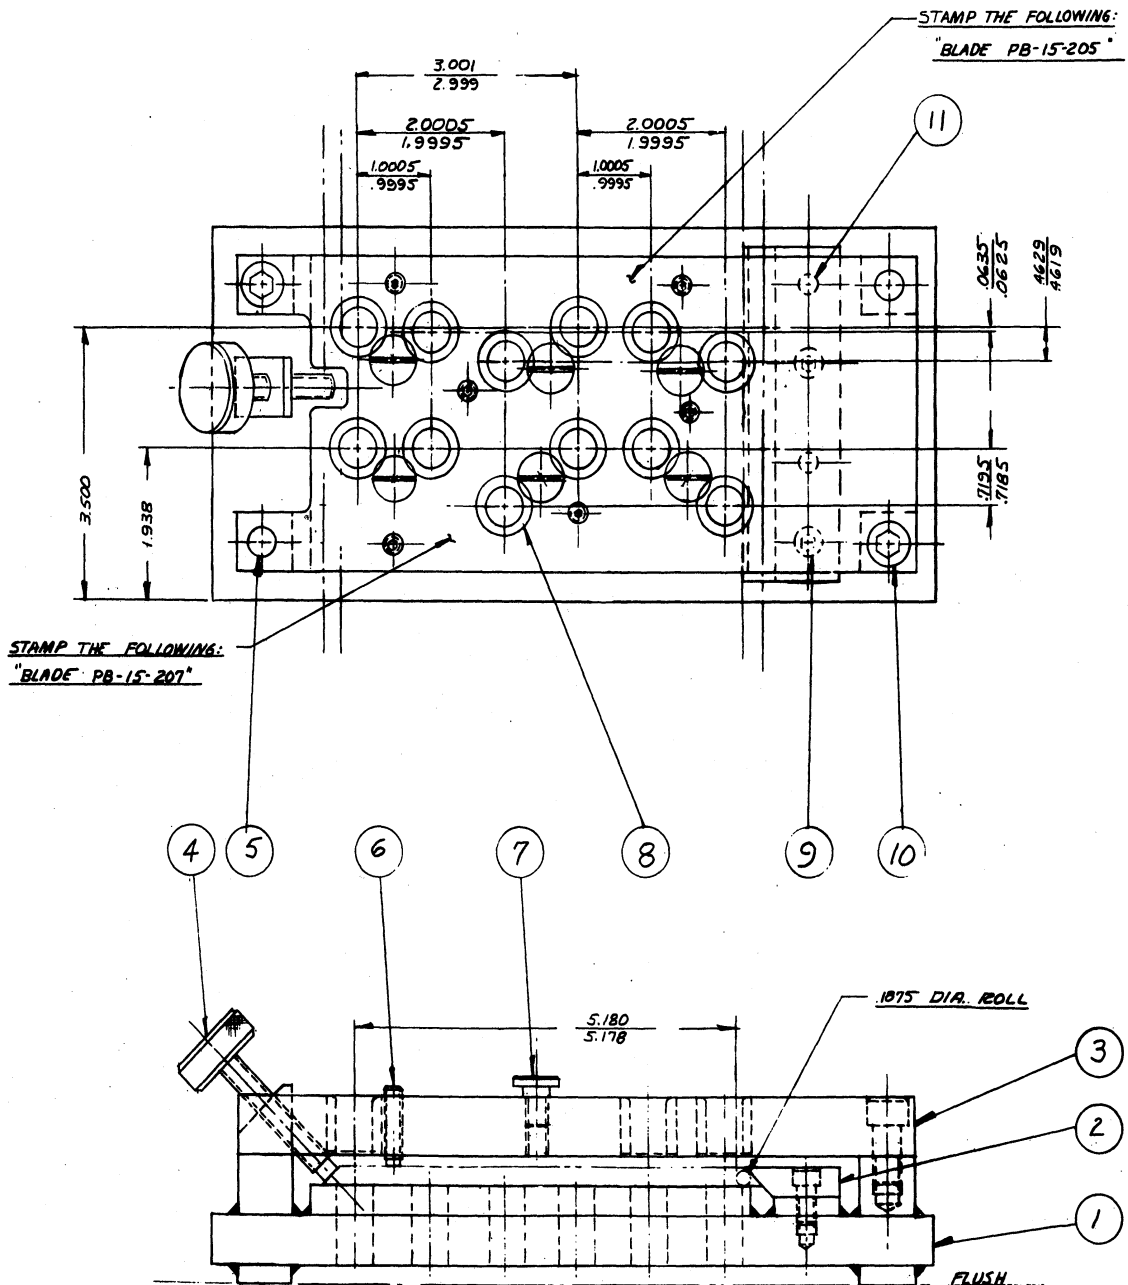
Typical drill jig for positioning mounting holes in plate.
